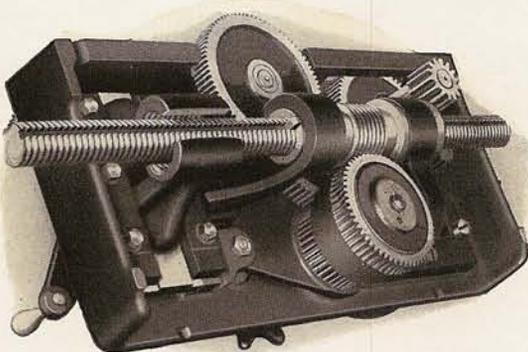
Interior View of Apron Showing Splined Lead Screw Used as Feed Rod and the Rigid Double Bracket for Supporting the Automatic Feed Worm
